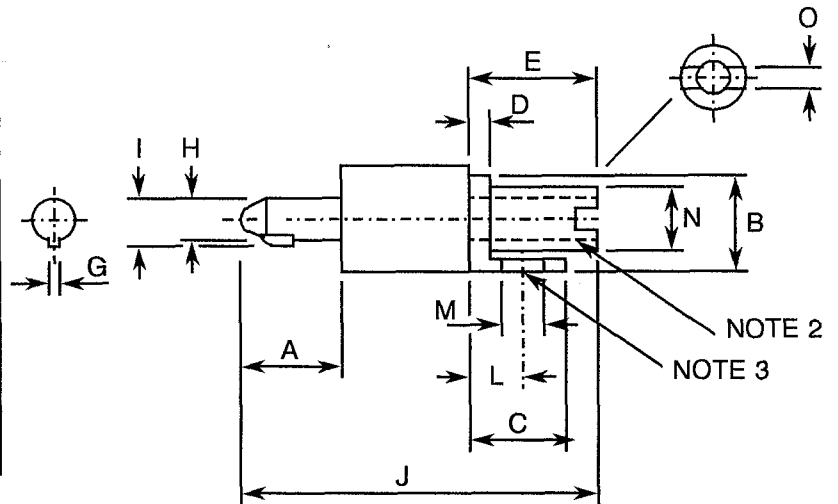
PHYSICAL DIMENSIONS(CONTINUED)
